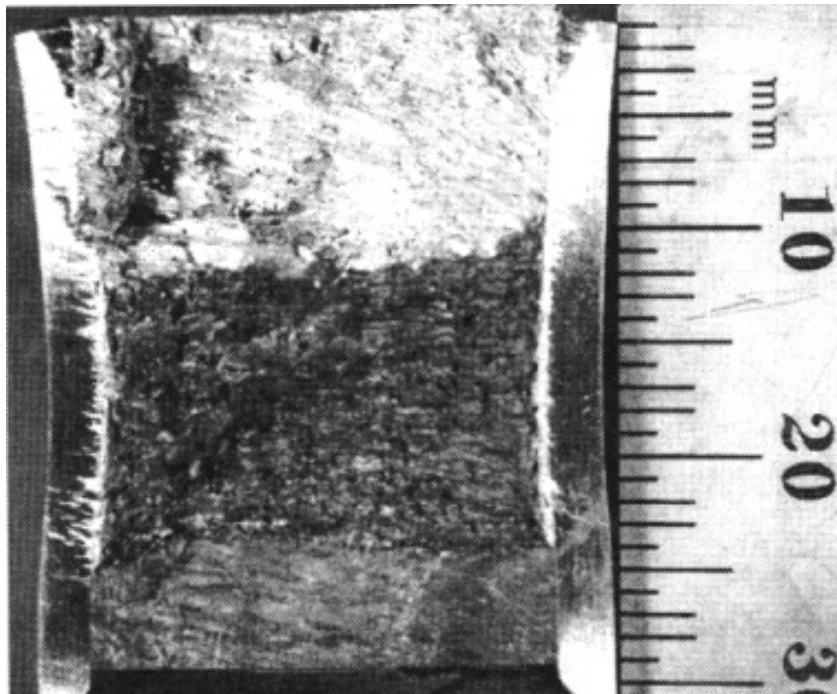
Fracture surface of aged weld metal PWCE tested at 290°C
